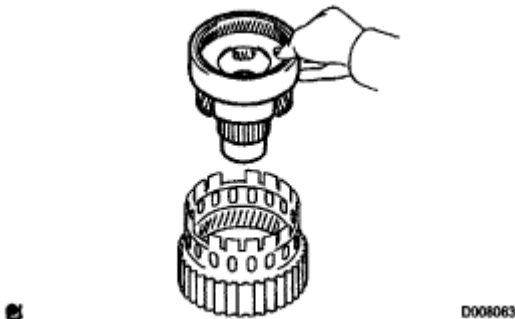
Installing Front Planetary Gear Assembly To Brake Hub
